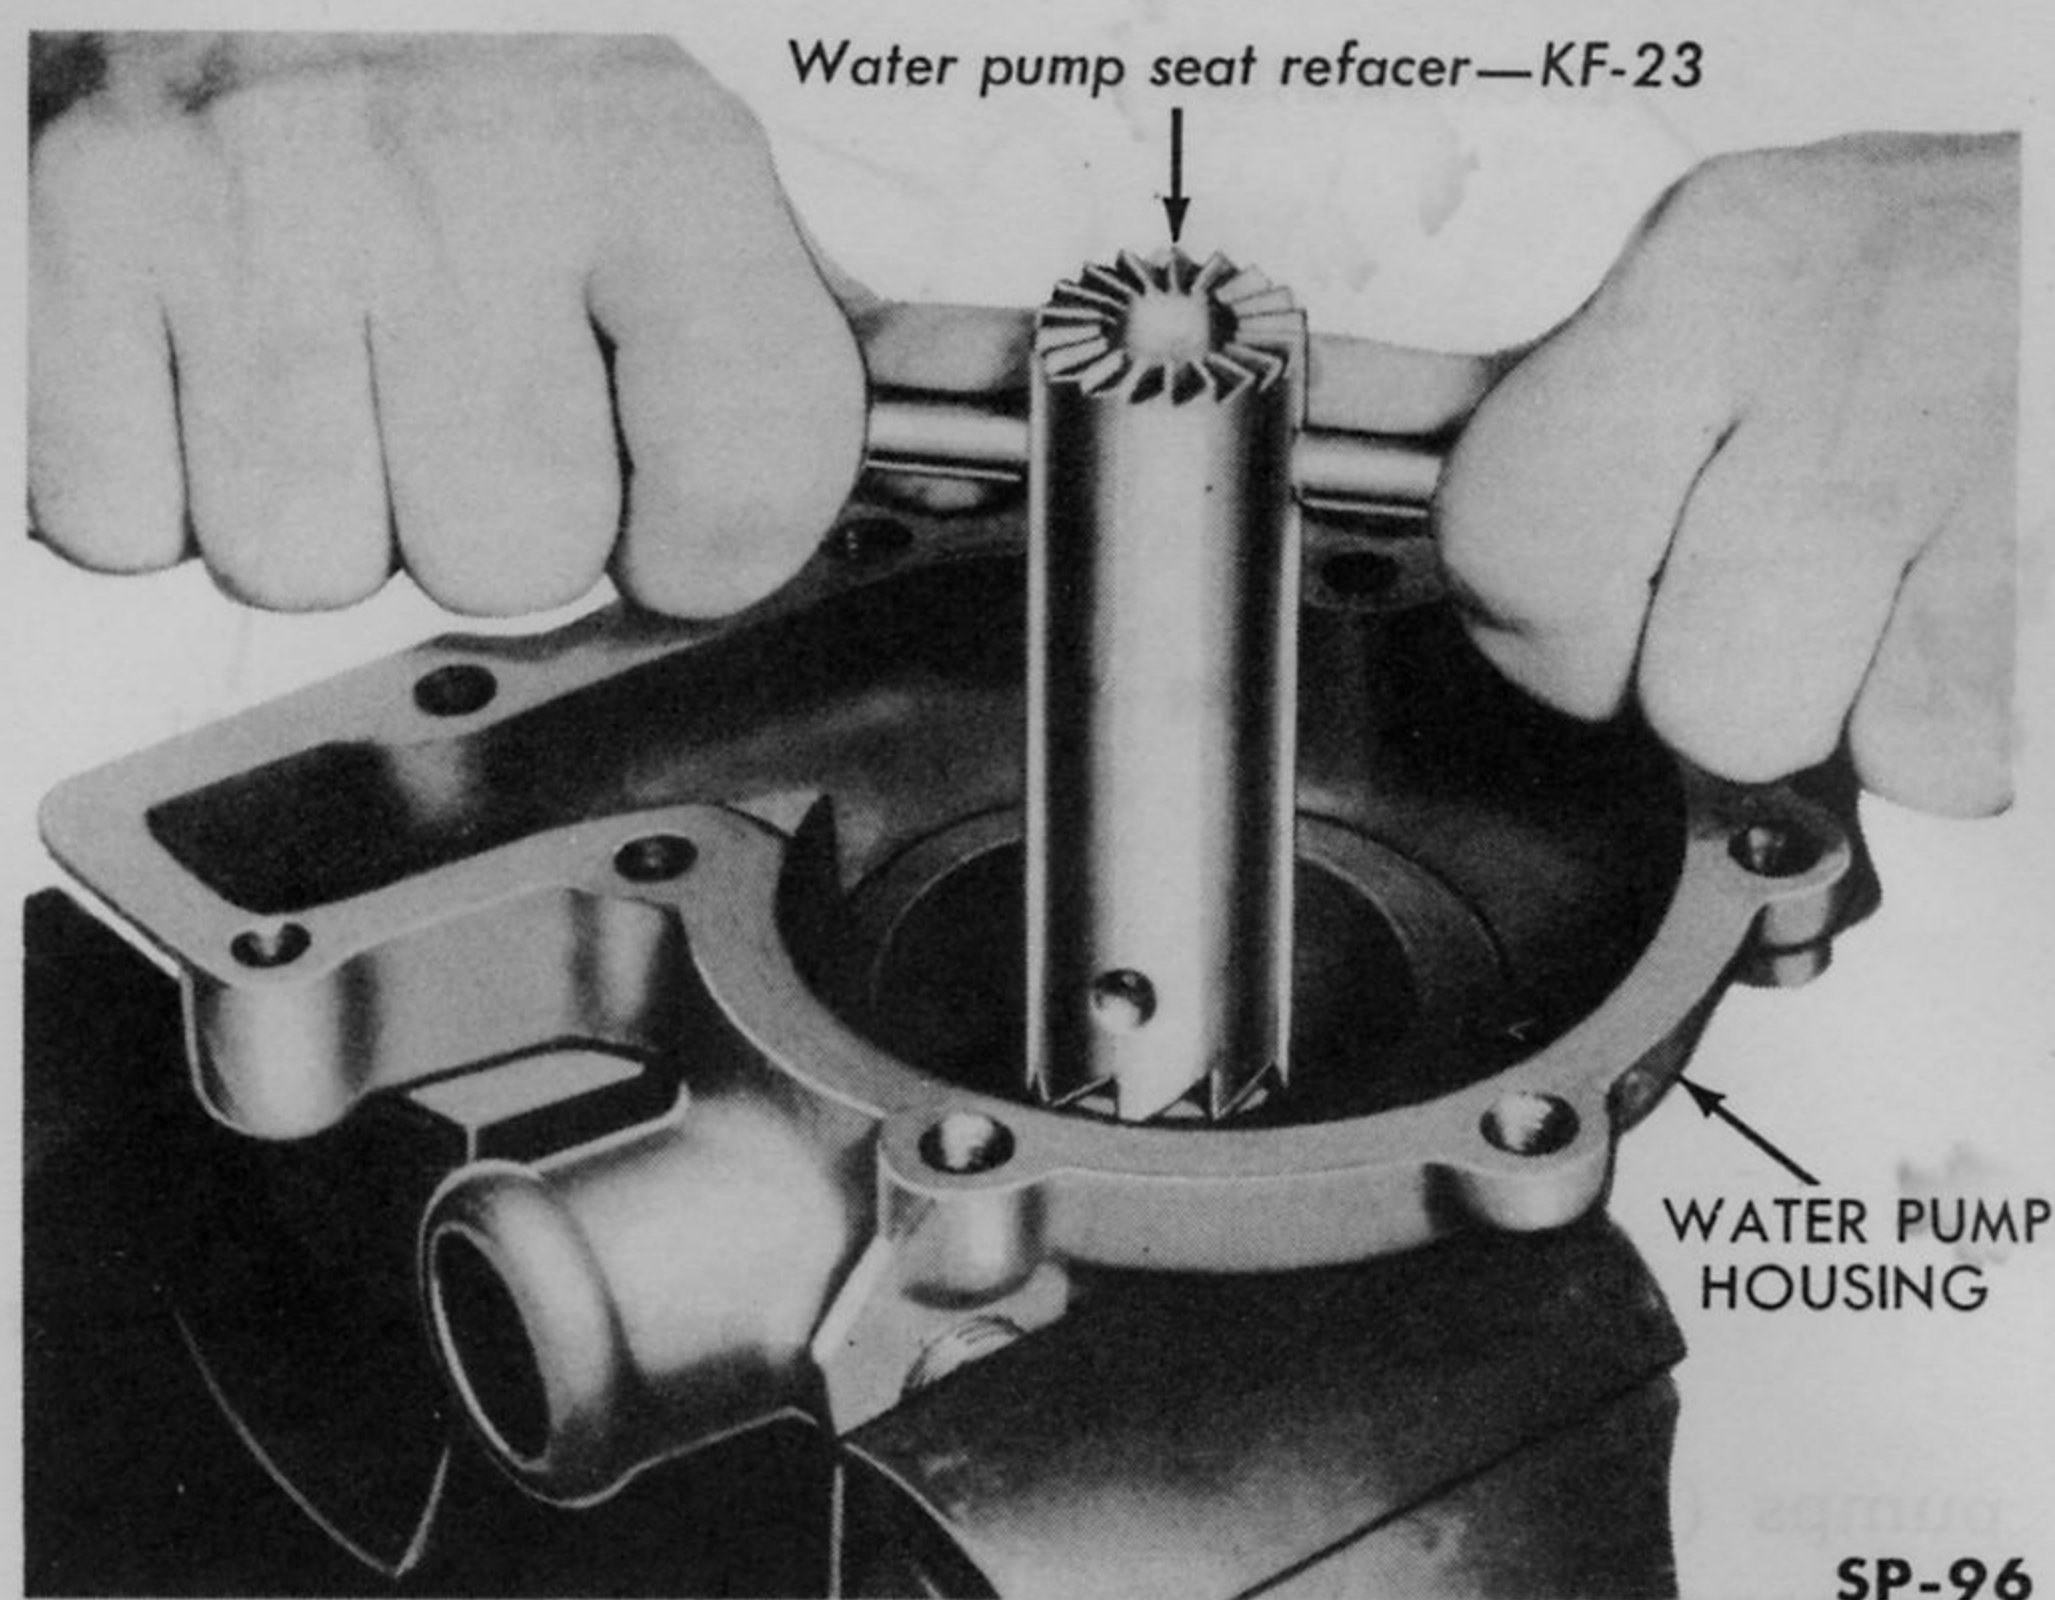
Refacing Water Pump Seal Seat in Housing—Frazer
